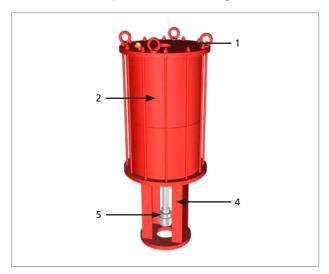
LP/S type 1/type 2 without stop bolt main components
